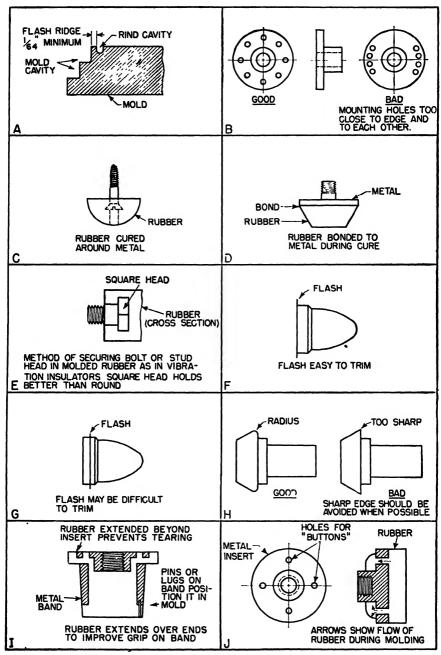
Some factors involved in the design of molded rubber products. (A) Section through a mold showing the flash ridge and rind cavity, which are provided to take
